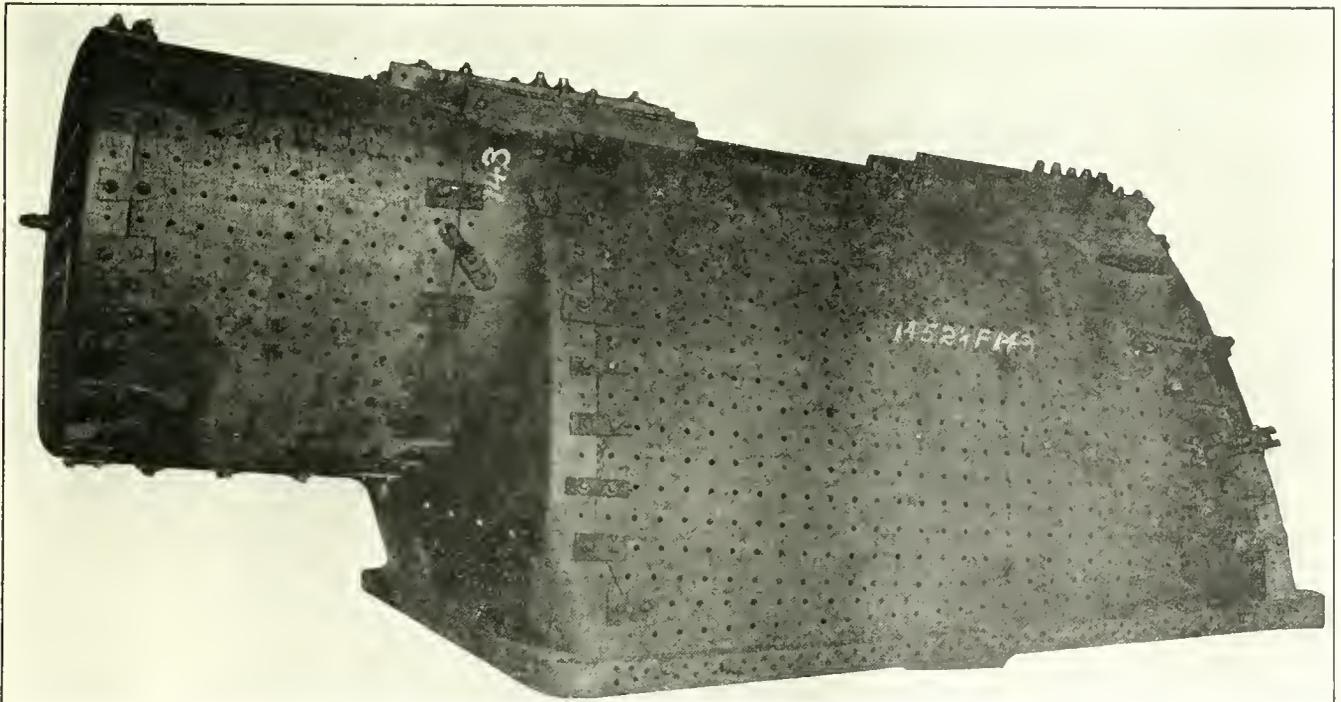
Showing a Complete Firebox, Combustion Chamber and Flue Sheet Bolted and Clamped Together Ready for Electric Welding
